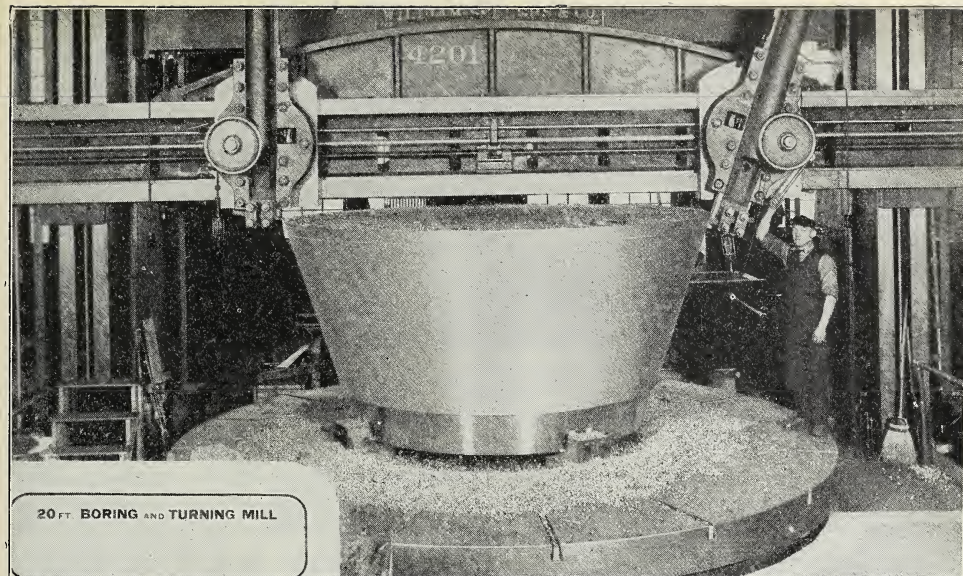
Fig. A. This machine is one of the tools that gives us machinery. The platform on which the man stands revolves, and pieces of metal, 20 feet in diameter, can be fastened to it, will revolve with it, and can be given smooth circular surfaces or have holes bored in them. Near the man's elbow is one of the two cutting tools now engaged in shaping the outside of the large piece of metal. The cutting tools move six feet vertically and ten feet horizontally. *Planers* and *lathes* work in much the same way.
